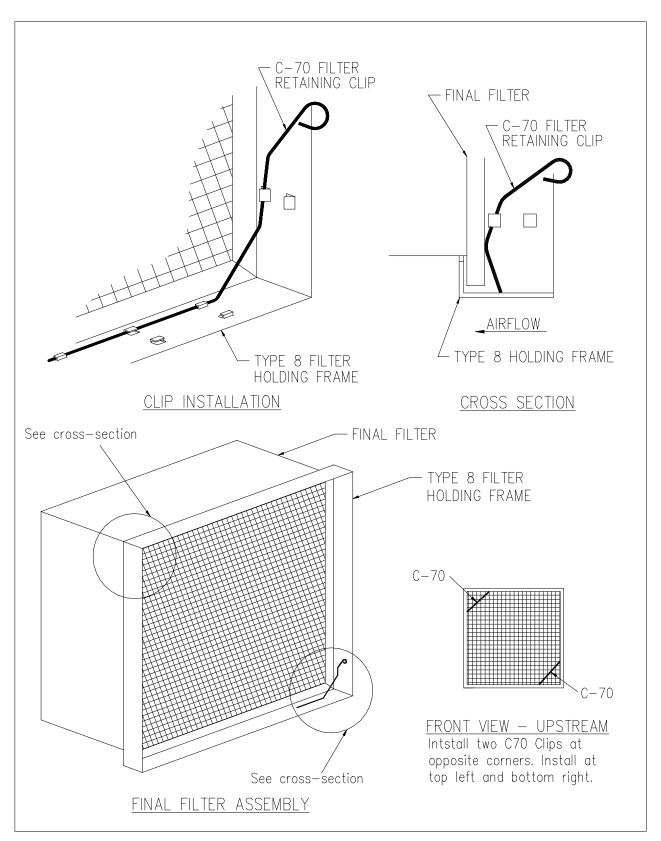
PH Style Final Filter Upstream Installation in Holding Frame.
